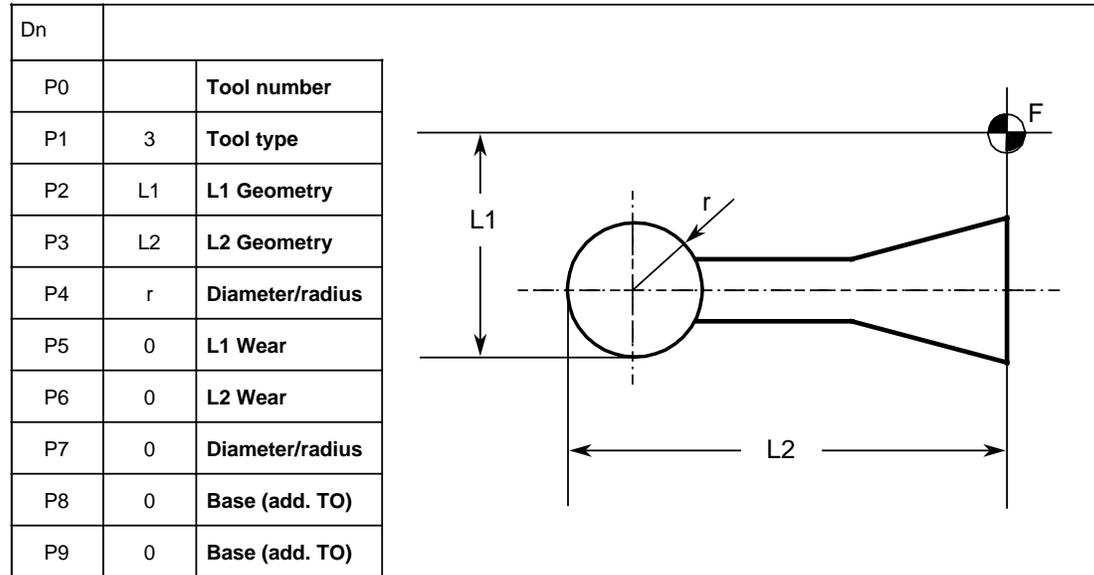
Calibrating tool in the TOA memory for turning machines
